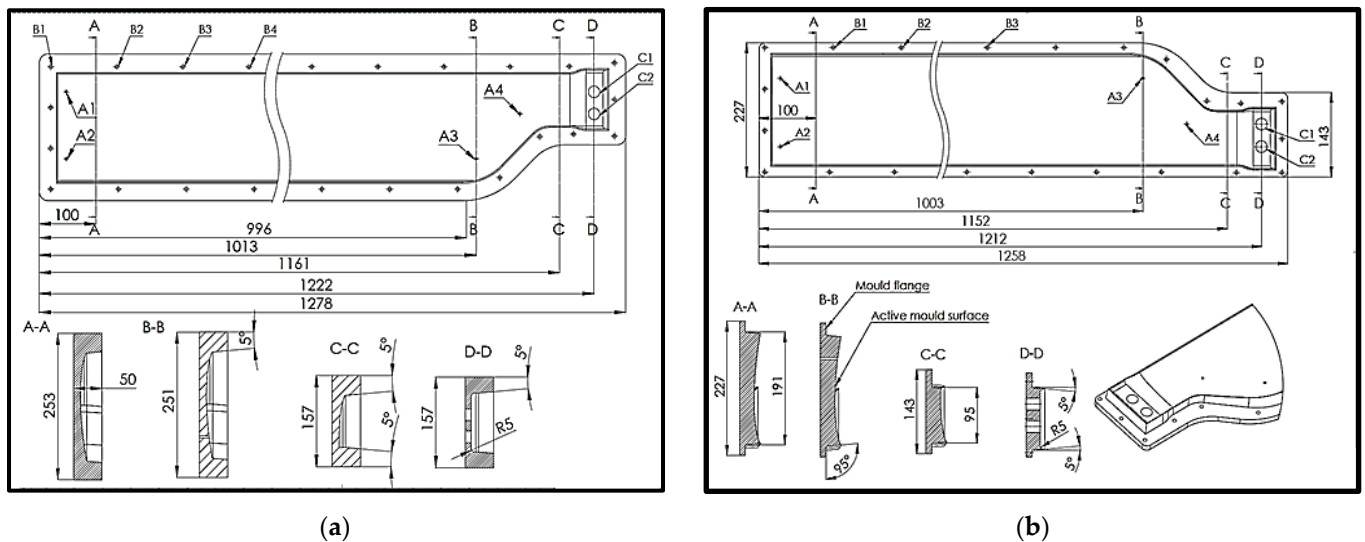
Helicopter blade mould drawing (dimensions in mm). (a) Lower mould (MAT-COMP V3-FEMALE). (b) Upper mould (MAT-COMP V3-MALE).
